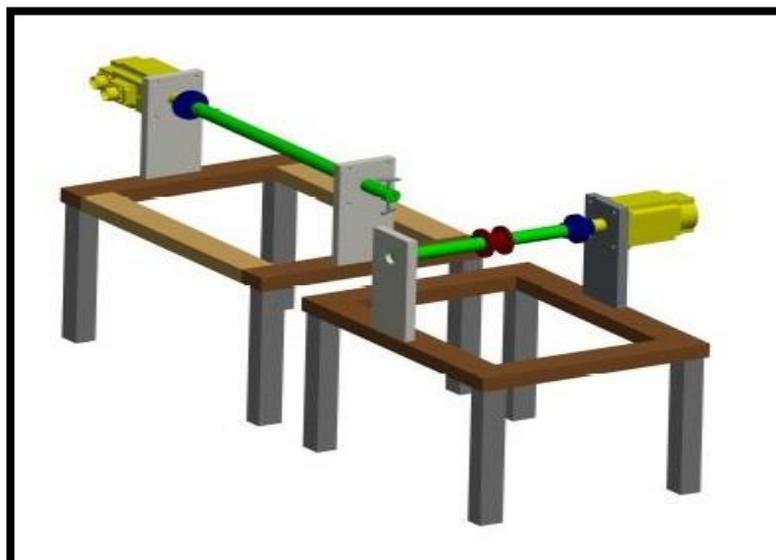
Three-dimensional diagram of Machine – 1 specifically for extracting and yarn making
